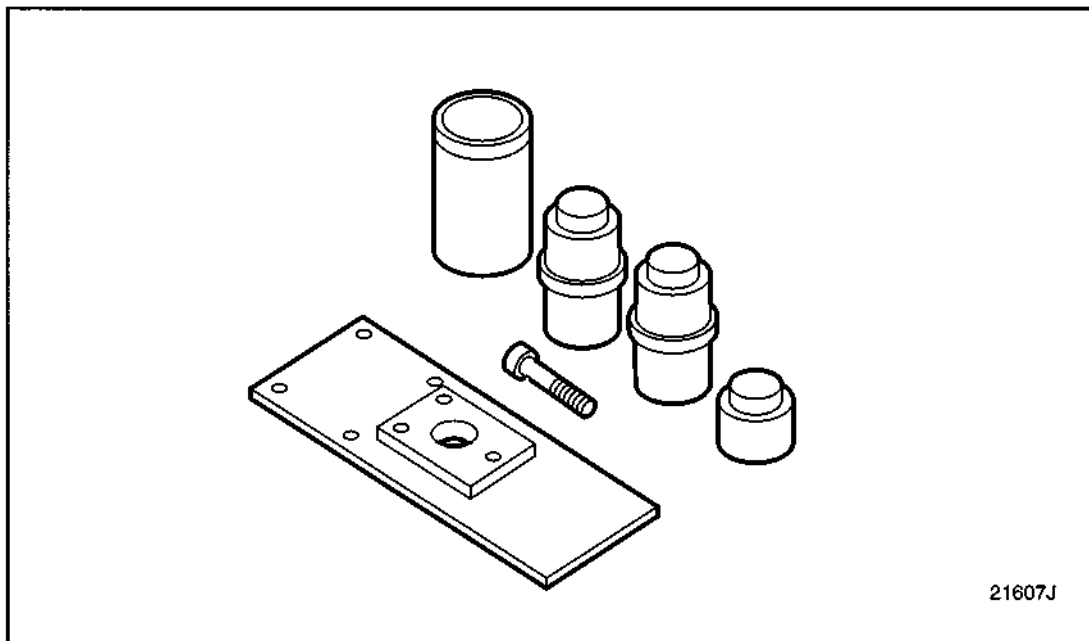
Accessory Drive Service Set,J 36024-C
